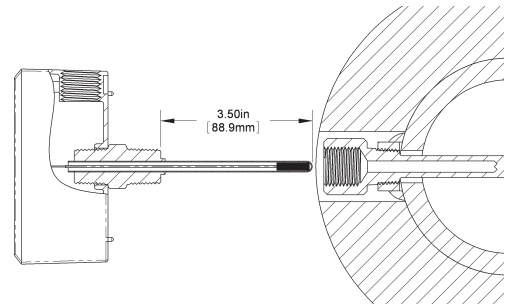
Extreme Temp Immersion with Weatherproof Enclosure
